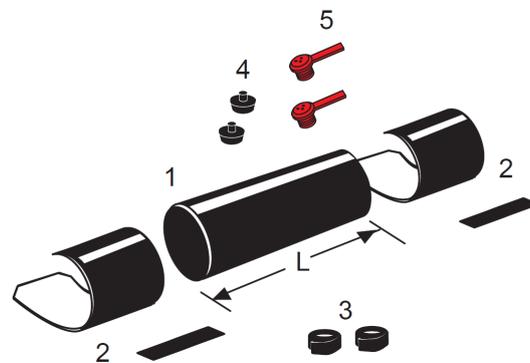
B2S Reduction. $L = 700$ mm. 1: Shrink Sleeve, 2: Shrink wrap with closure patches, 3: Sealing Tape 4: Weld Plugs, 5: Venting Plugs. [25]
